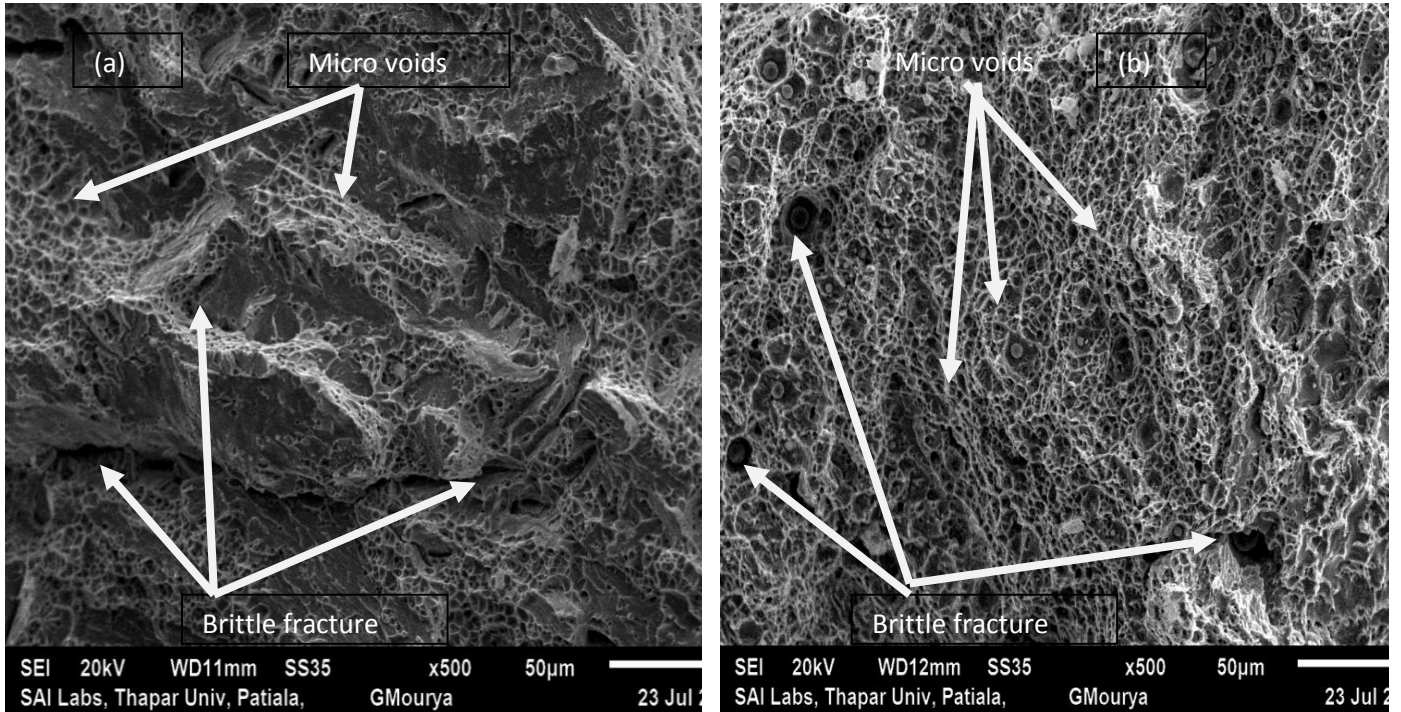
SEM of weldments fractures surfaces (a) with Vanadium 0.4% and (b) with nickel 20%, of Charpy impact broken specimens tested at 25⁰C temperature
